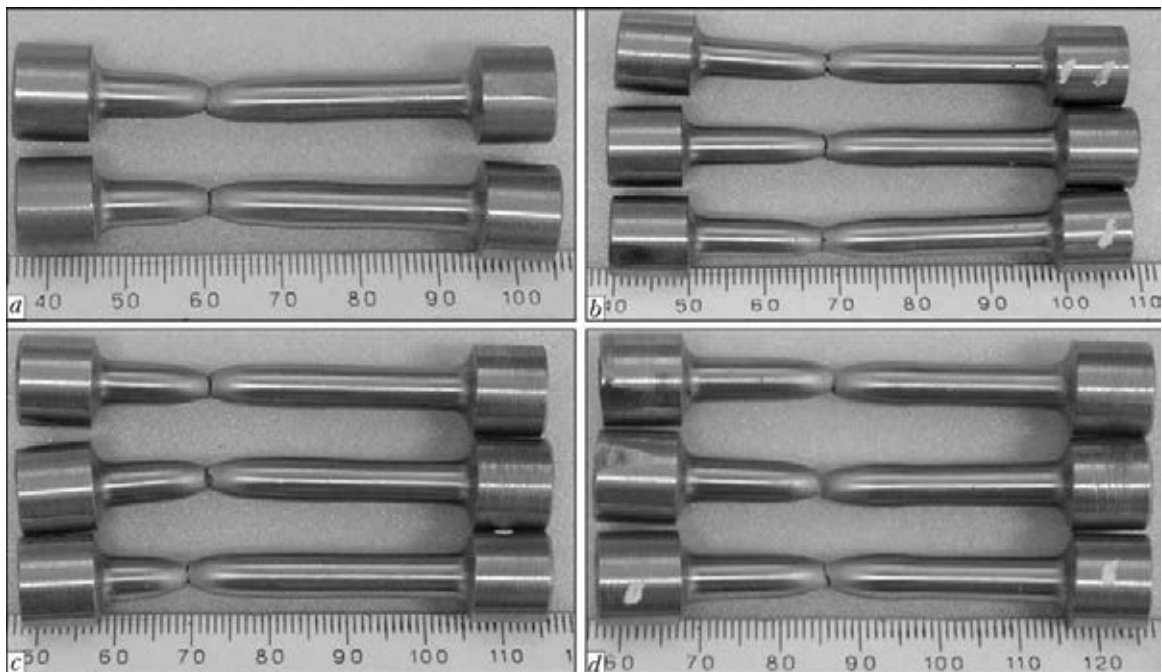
Specimens after mechanical rupture tests of welded joints of heat-resistant steels 10Kh12M (a, b) and 10Kh9MFBA (c, d) after EBW (a, c), EBW and next tempering (b, d)
